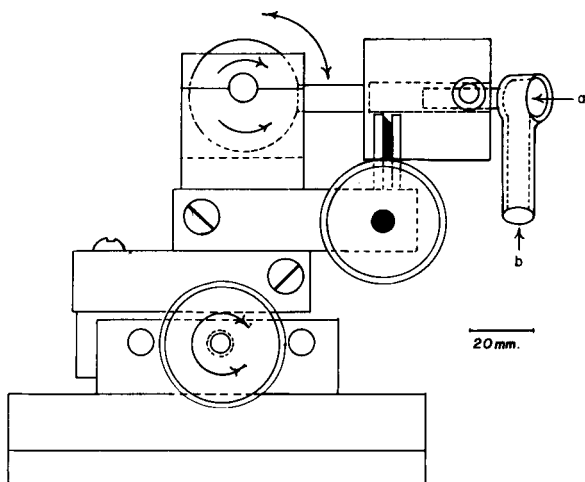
Sampler holder assembly: (a) indium-lined cavity; (b) input from gas chromatograph.
